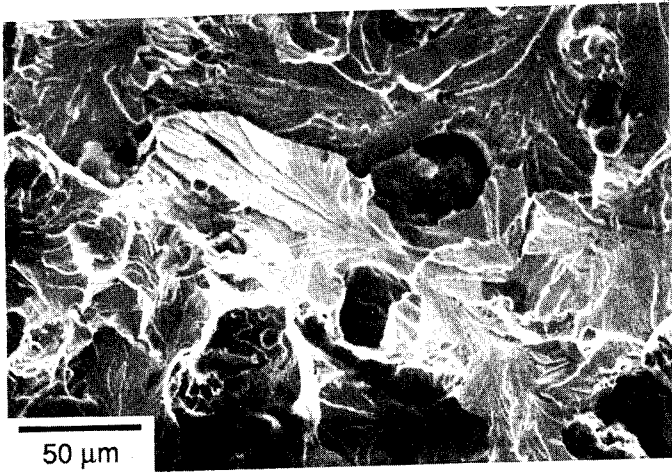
A higher magnification fractograph of the ductile iron tensile specimen showing transgranular cleavage fracture in pearlite.
